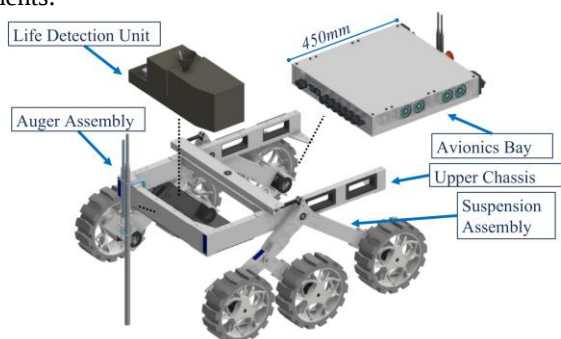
Exploded CAD View of O.R.E.D.G.R.
